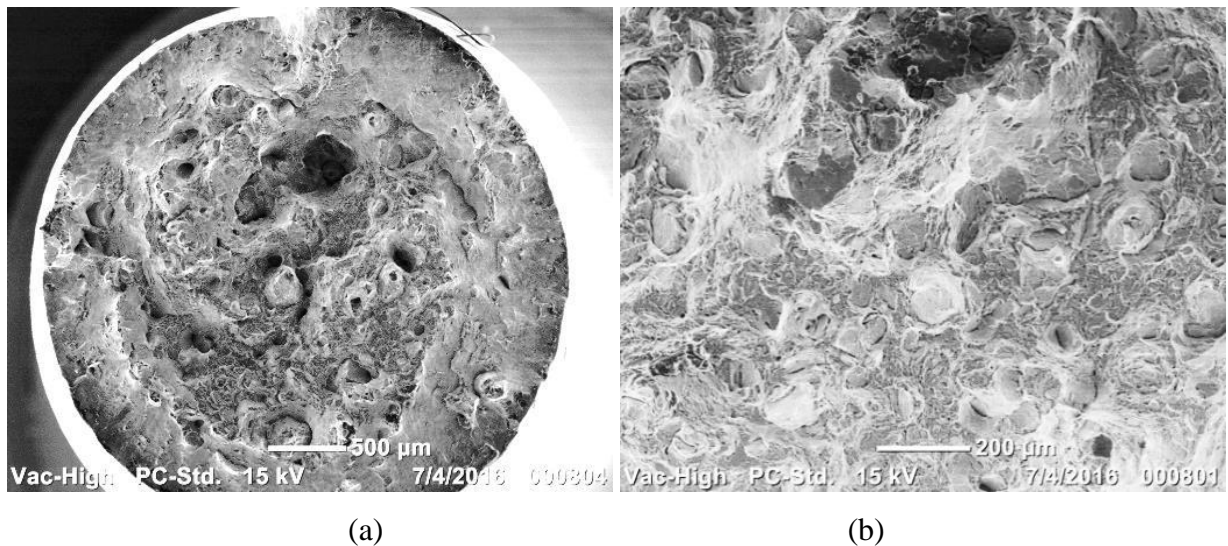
Fracture surface of standard vertical samples: (a) cup-and-cone shape; and fracture surface at higher magnification (b).
